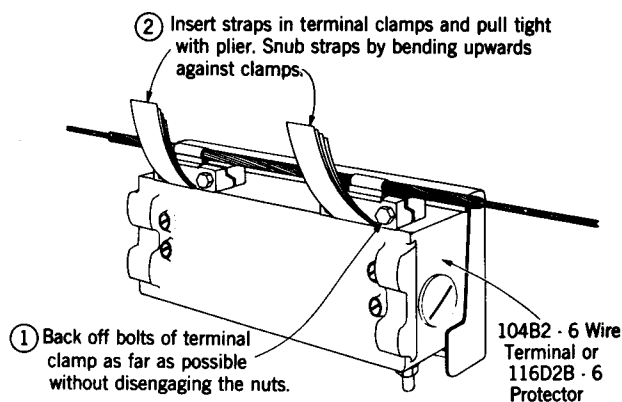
Inserting Cable Supports In Terminal Clamps
